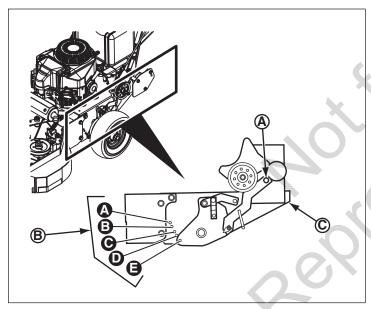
Adjusting the Axle Position (Left Side Shown with Tire and Pulley Guard Removed)
